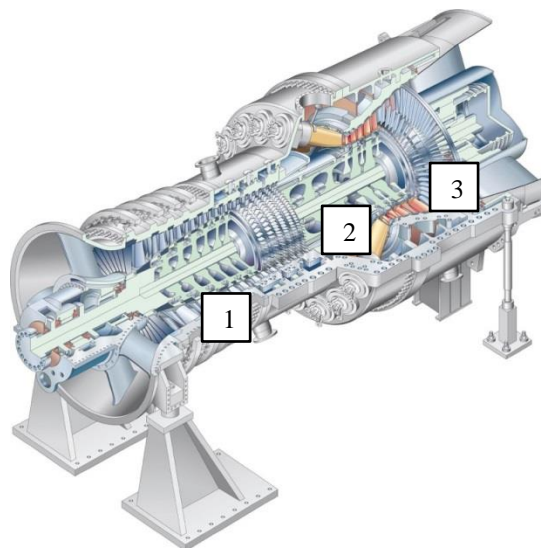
The SGT5-8000H developed by Siemens: 1- compressor, 2-combustion chamber, 3- turbine section
